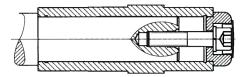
Gear unit mounted to shaft with a shoulder using the fastening element
